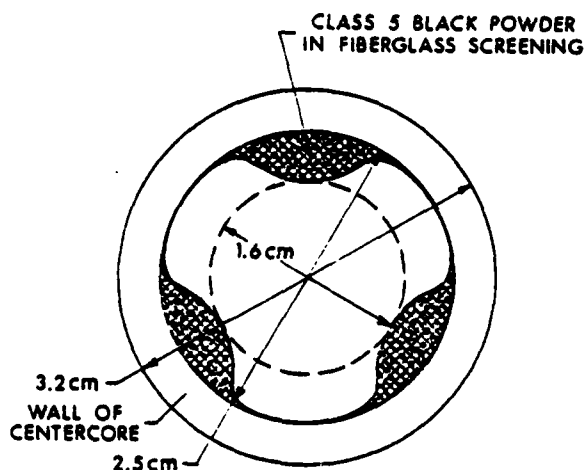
Cross Section of Snake/Centercore Assembly, Design 4
